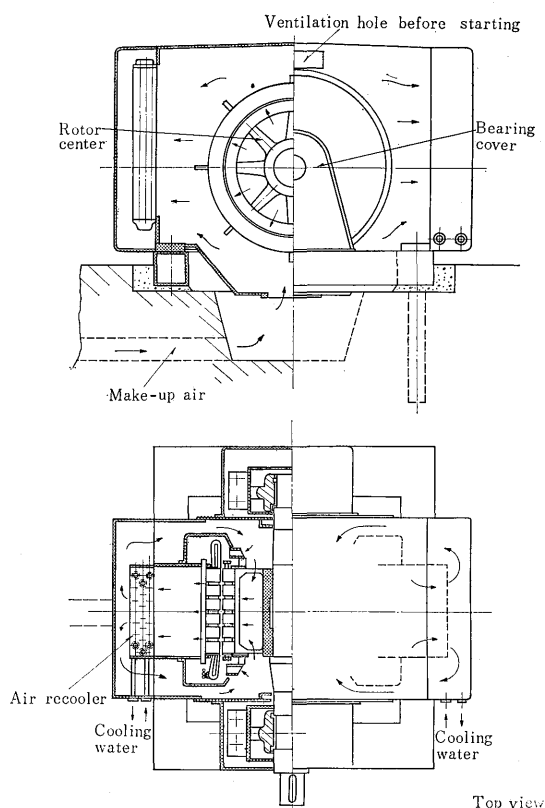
Section of outdoor use totally enclosed air circulated water cooled sealing system pressurized explosion-proof induction motor
